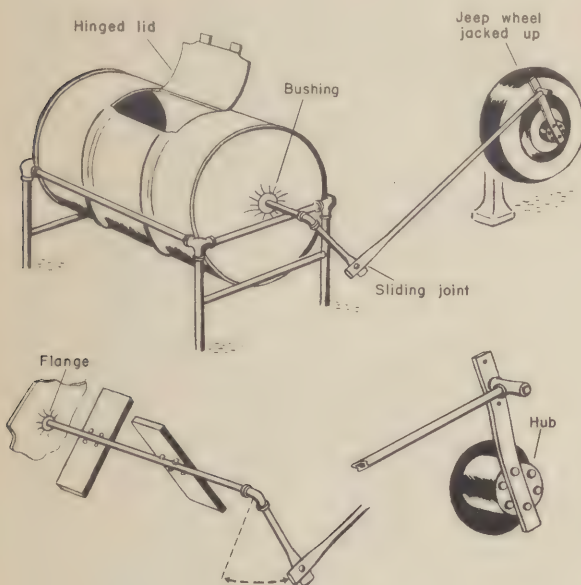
Horizontal Drum Type Rotating Paddle Washing Machine
